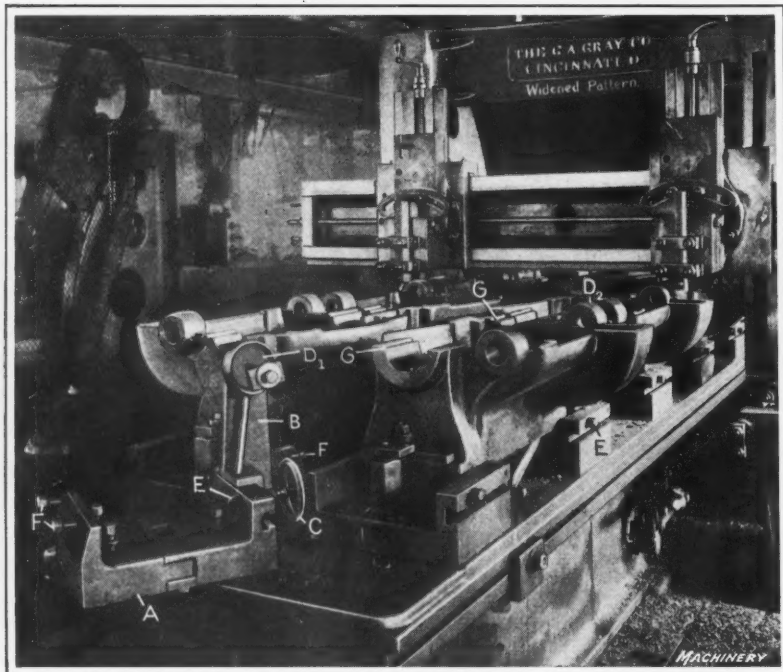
Close-up View of Lathe Headstock Castings and Planer Tools. Set-up for this Job is shown in the Heading Illustration
